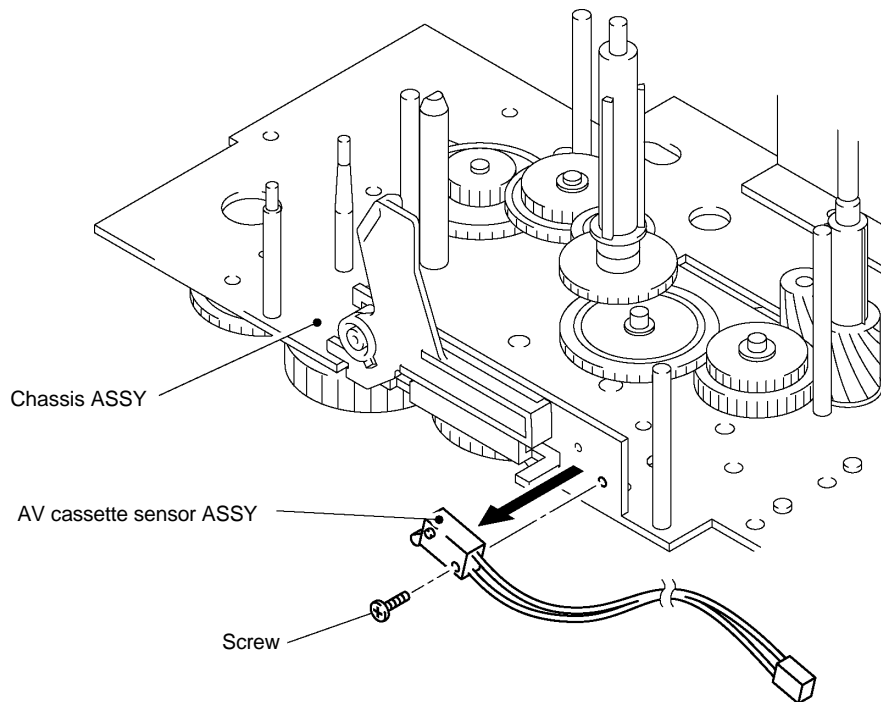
Removing the AV Sensor Actuator/AV Cassette Sensor ASSY (1)
